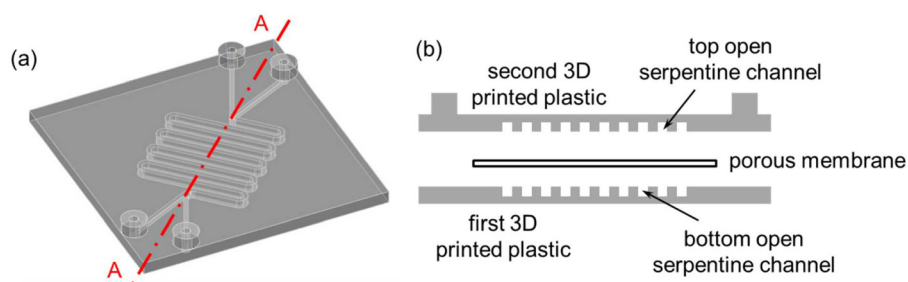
(a) 3D CAD model of the first perfusion fluidic device without the porous membrane. (b) Schematic diagram of the exploded cross-sectional view of Section A–A depicted in (a) with the porous membrane separating the top and the bottom open serpentine channels.
